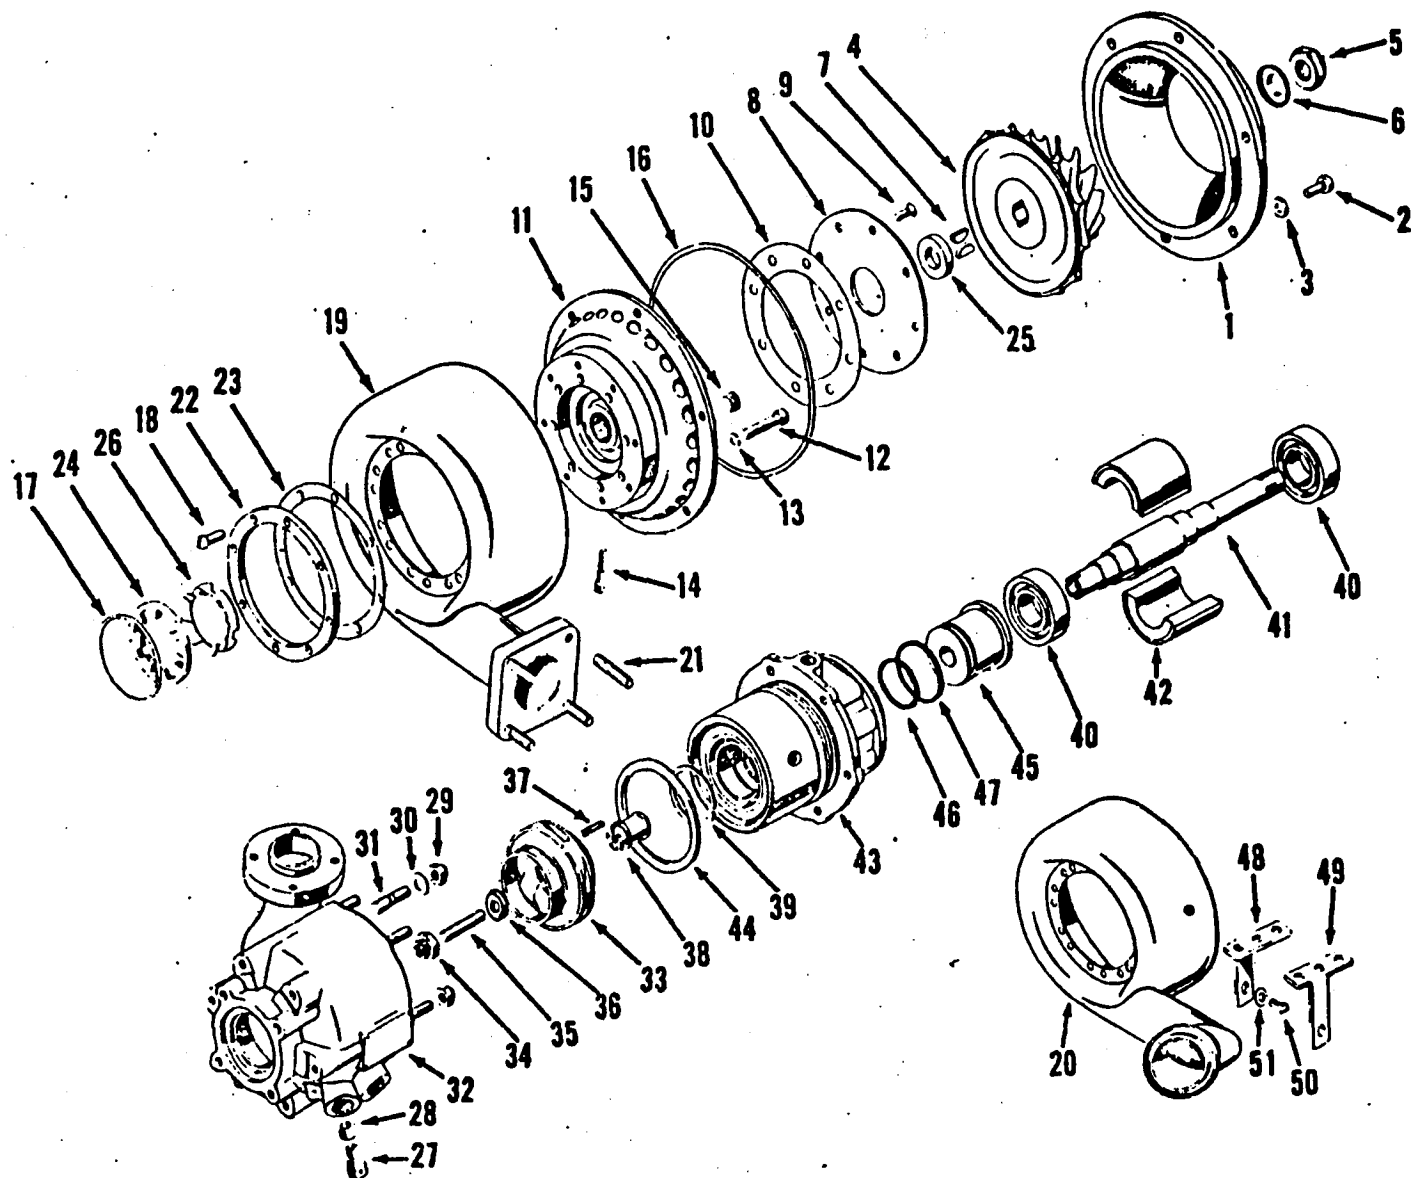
Air Turbine Driven Fuel Pump Subassembly
